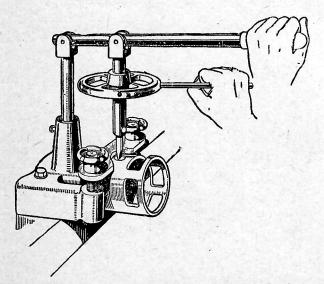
The use of a wheel-operated screwdriver is necessary to remove and replace the pole shoe attachment screws.
